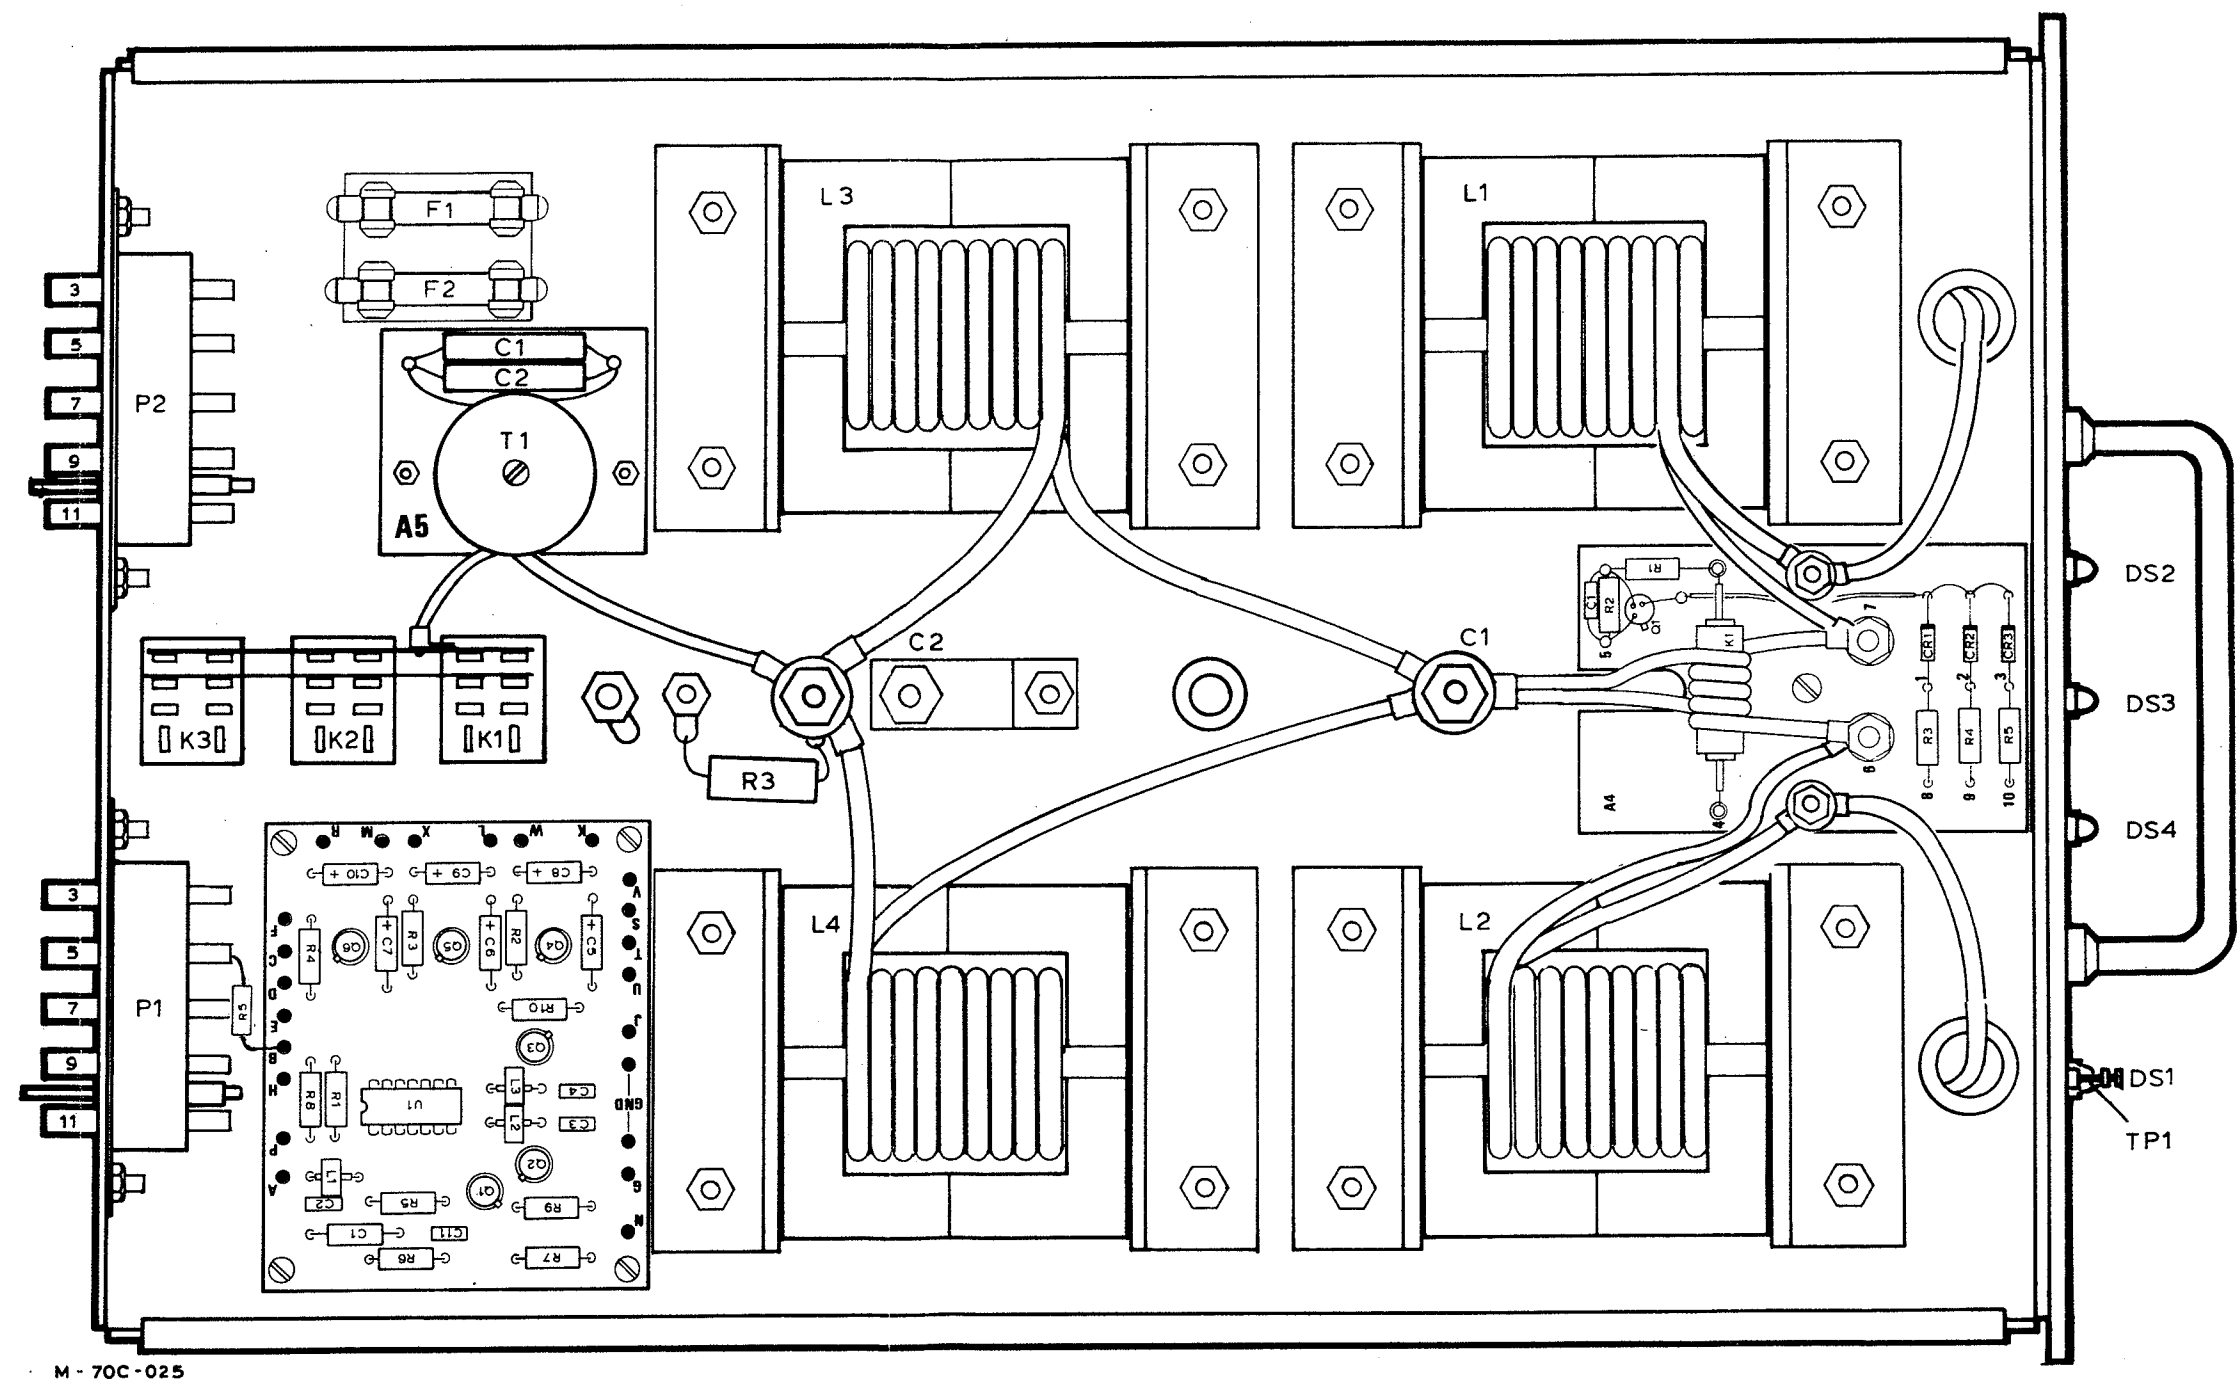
Assembly Detail - NASM1A Modulator Module, Bottom View
